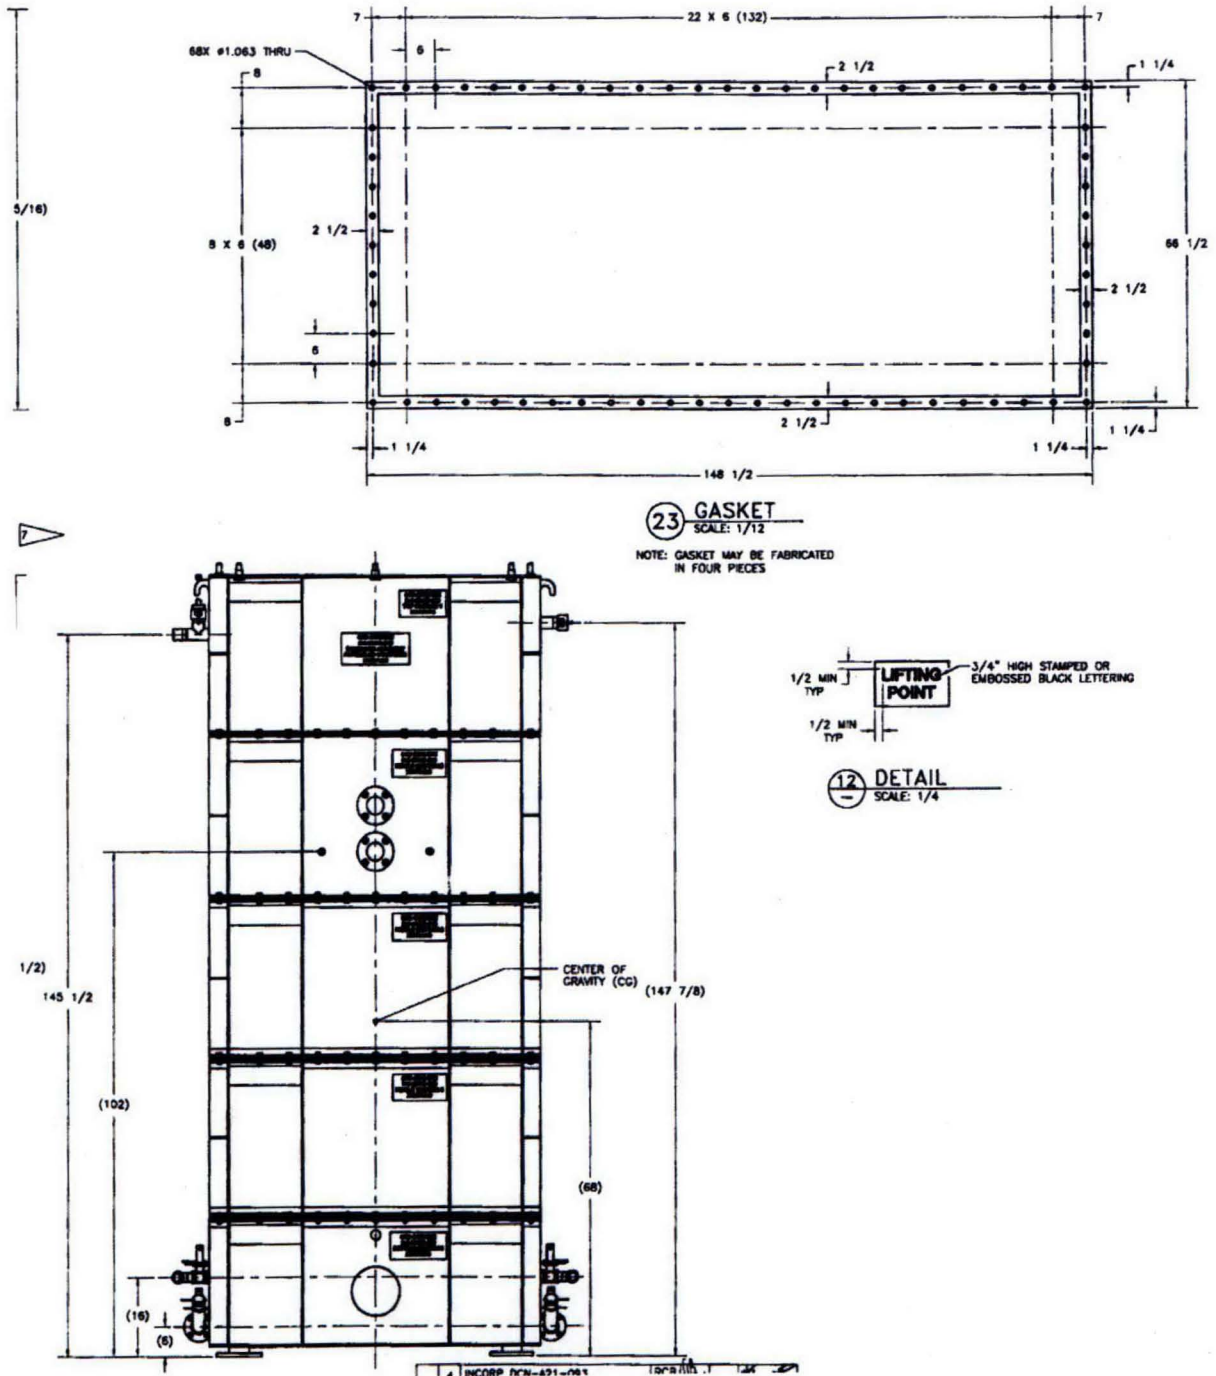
SCS-CON-230 wideview elevation and gasket plan views from drawing H-1-88419-03, Rev. 4.
